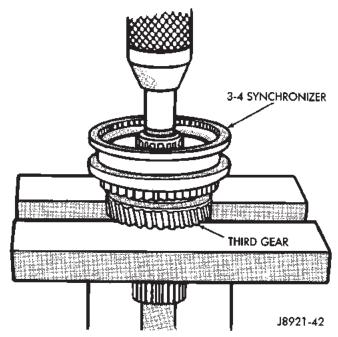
Remove 3-4 Synchronizer And Third Gear
